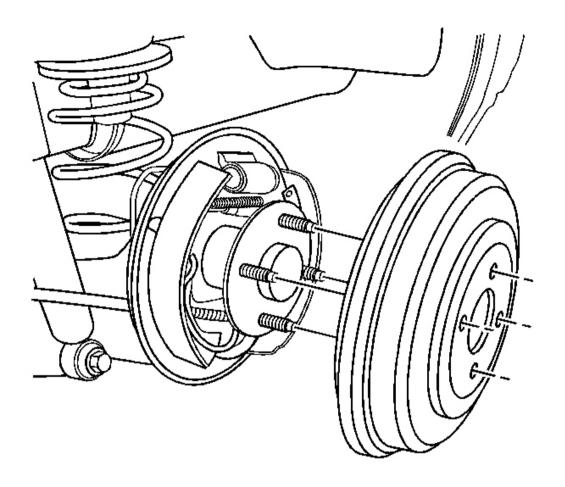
Removing/Installing Brake Drum Courtesy of GENERAL MOTORS CORP.
